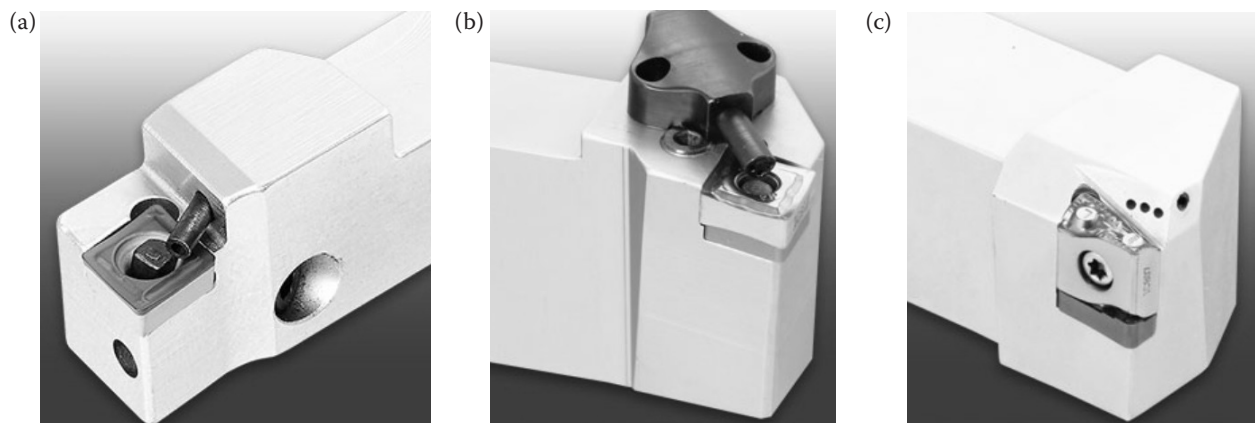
Iscar HP-HELI TURN (a) fixed cooling channels, (b) with housing and (c) the nozzle tube integrated in a holder
